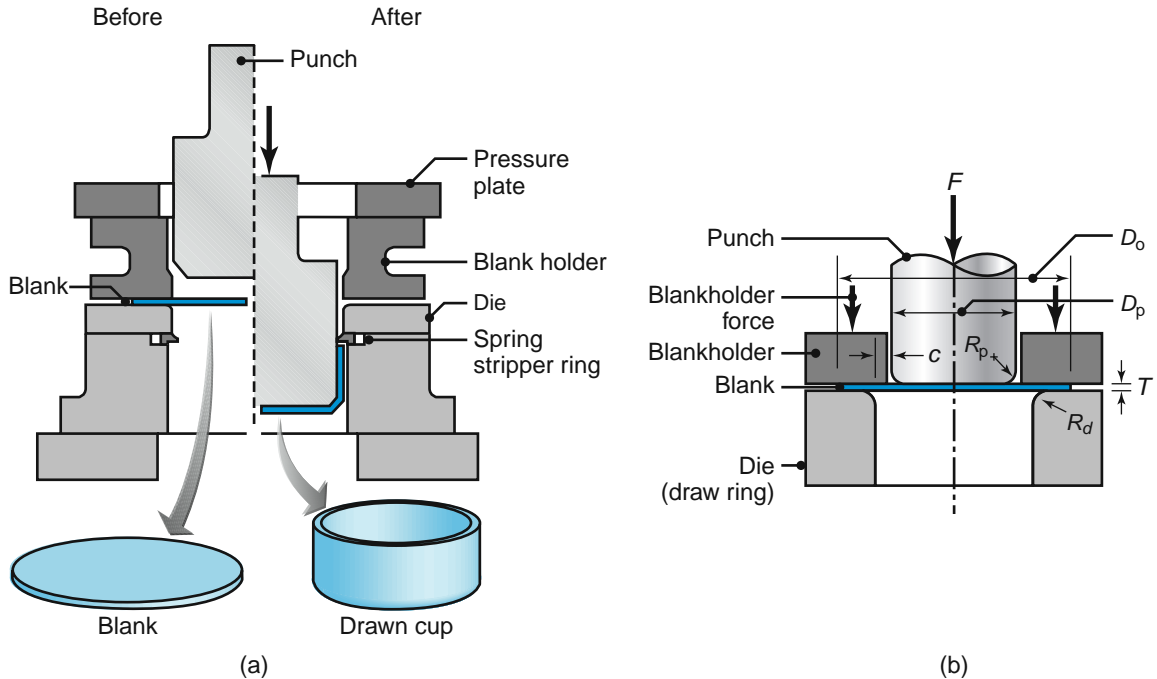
(a) Schematic illustration of the deep-drawing process on a circular sheet-metal blank. The stripper ring facilitates the removal of the formed cup from the punch. (b) Process variables in deep drawing. Except for the punch force, F , all the parameters indicated in the figure are independent variables.
